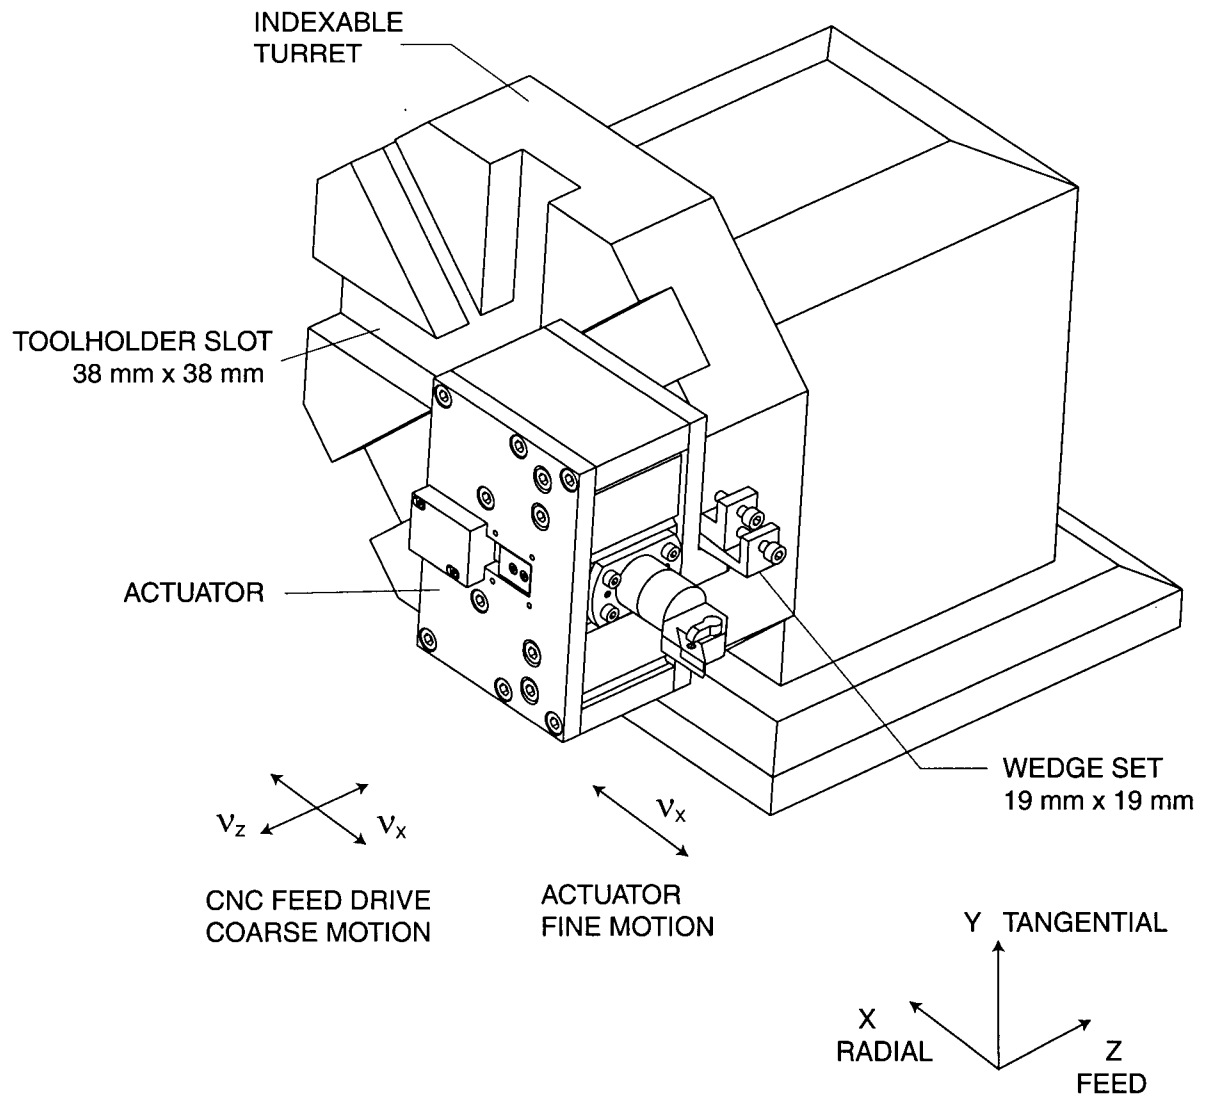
Actuator mounted to a Hardinge lathe turret.
